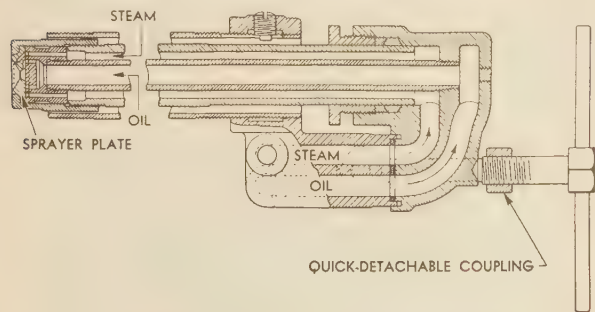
BABCOCK & WILCOX STEAM MECHANICAL ATOMIZING BURNER FOR OIL FIRING
